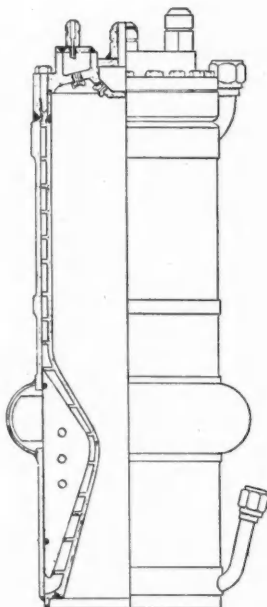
Section of 1500-lb thrust rocket motor, showing, from top to bottom, propellant injector, combustion chamber and exhaust nozzle.
